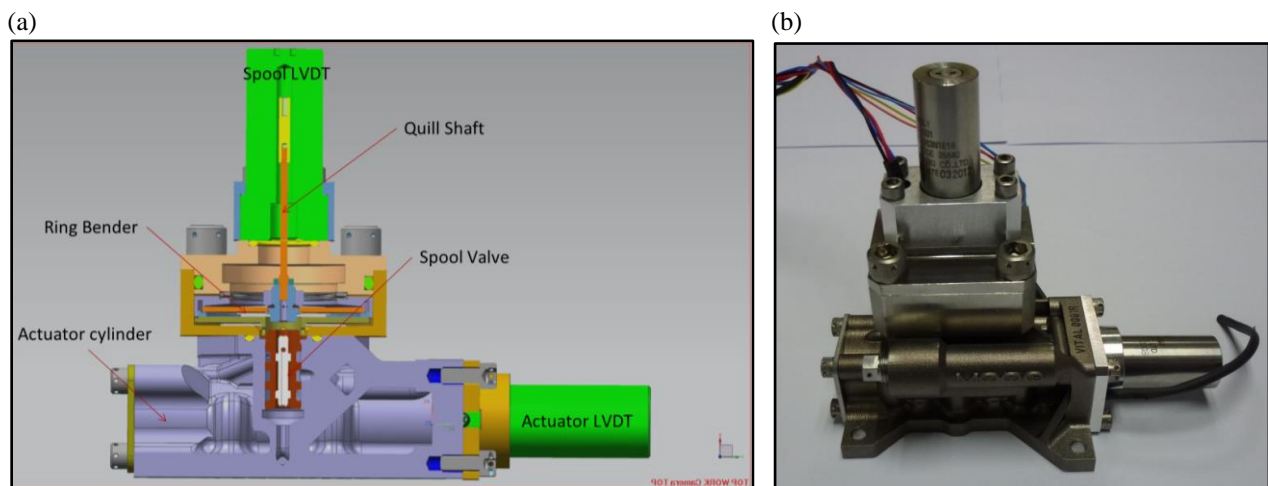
Piezo valve: (a) cross section of valve, (b) assembled valve with actuator
